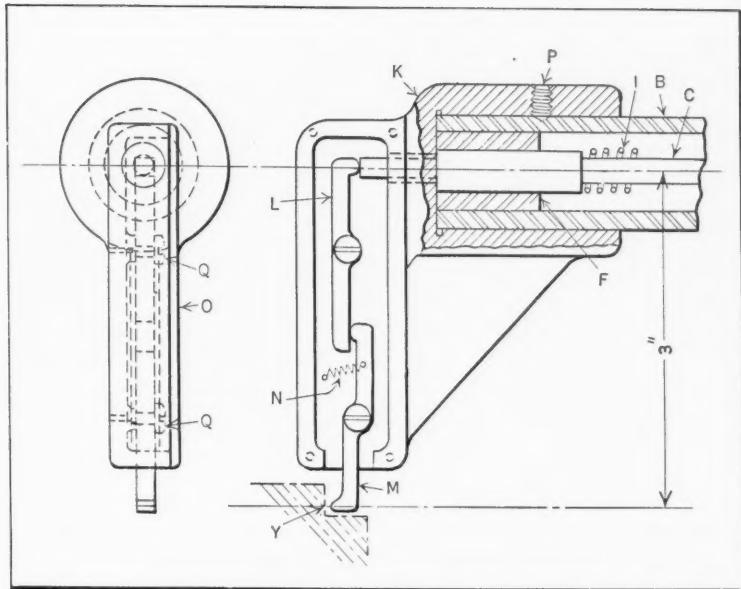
Offset Attachment Applied to Spindle End of Gage Shown in Fig. 1
